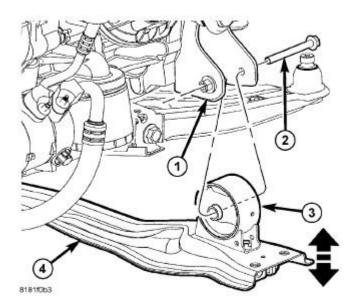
Fore/Aft Crossmember & Bolts Courtesy of CHRYSLER GROUP, LLC
